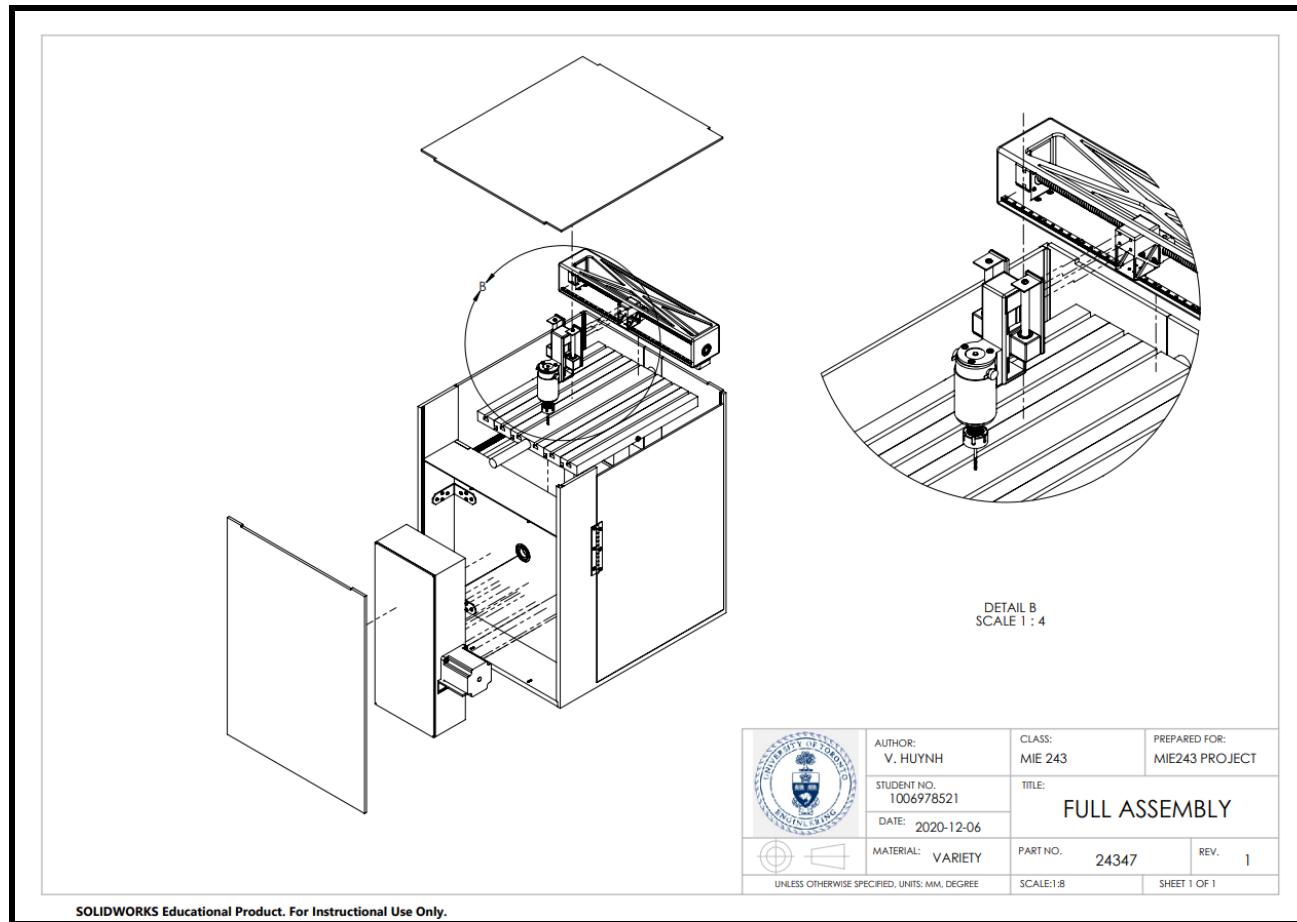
Full assembly drawing, more detailed parts drawing below.
